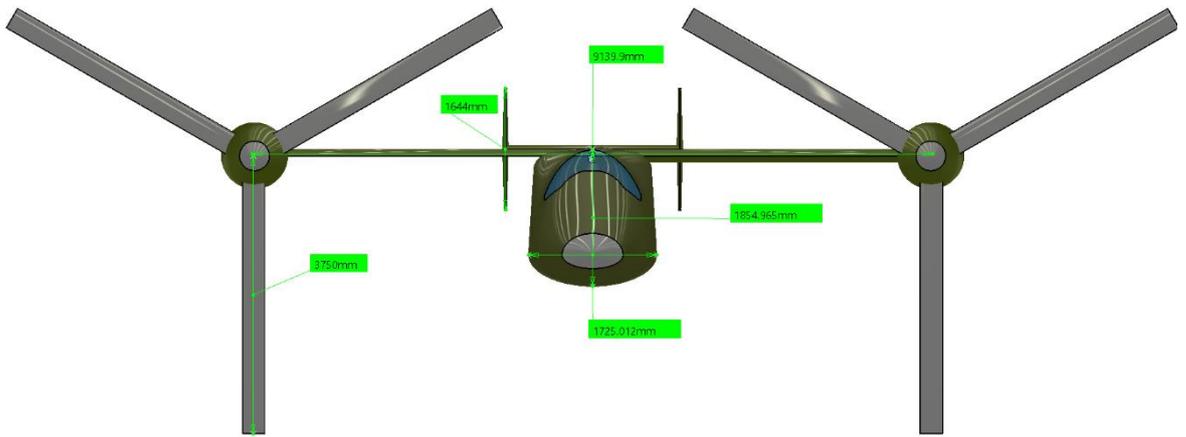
Dimensions of the Helicopter HB-1. (Front View)
